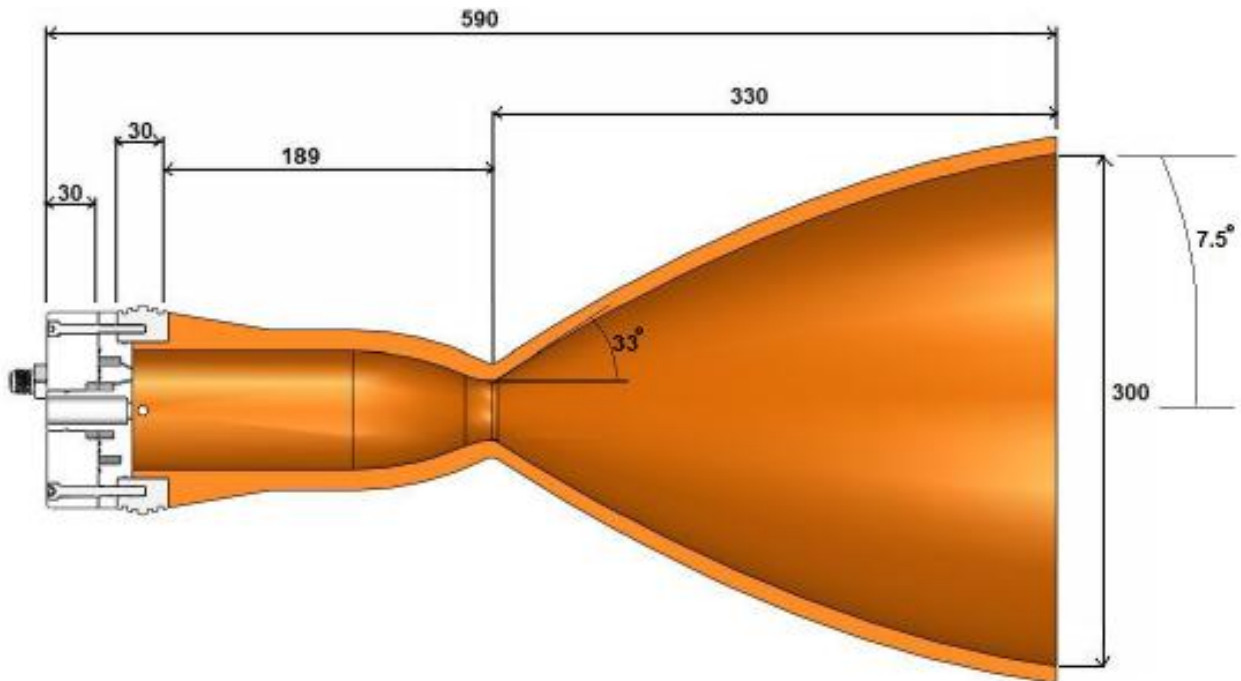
Upper Stage Engine Cross-Sectional View. Dimensions in mm
